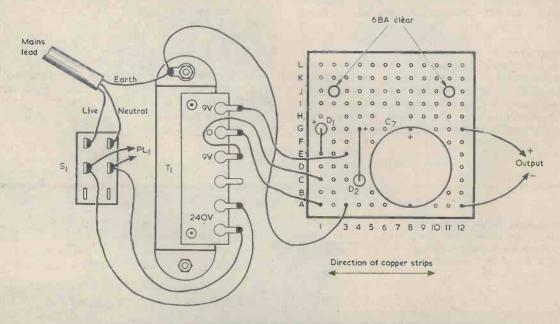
The wiring of the power supply section. The transformer tag layout is that for the particular component employed in the prototype; other transformers may have their tags positioned differently. There are no breaks in the Veroboard copper strips
